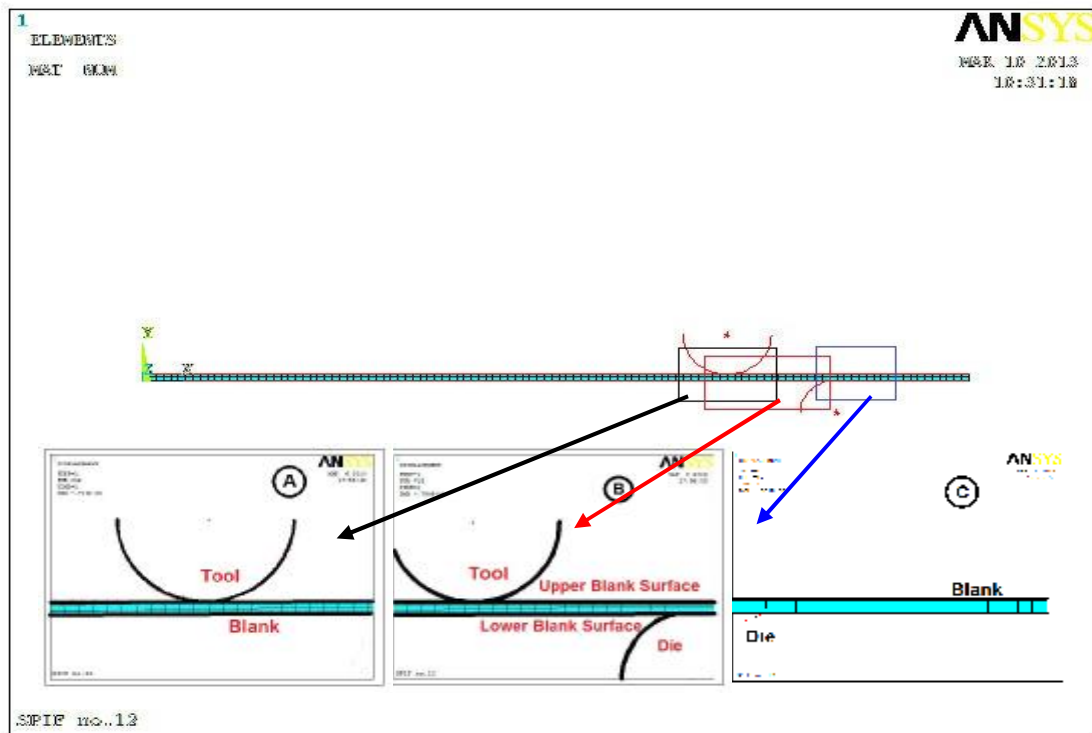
Illustrated Three Type of Contact used in Incremental Forming.
